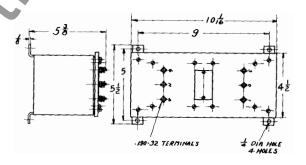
Outline and Drilling Plan for Phase Shifting Transformer used with 3-Phase, 4-Wire Varmeter
